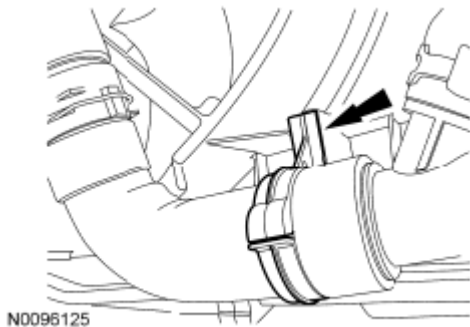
Locating Lower Radiator Hose Pin-Type Retainer
